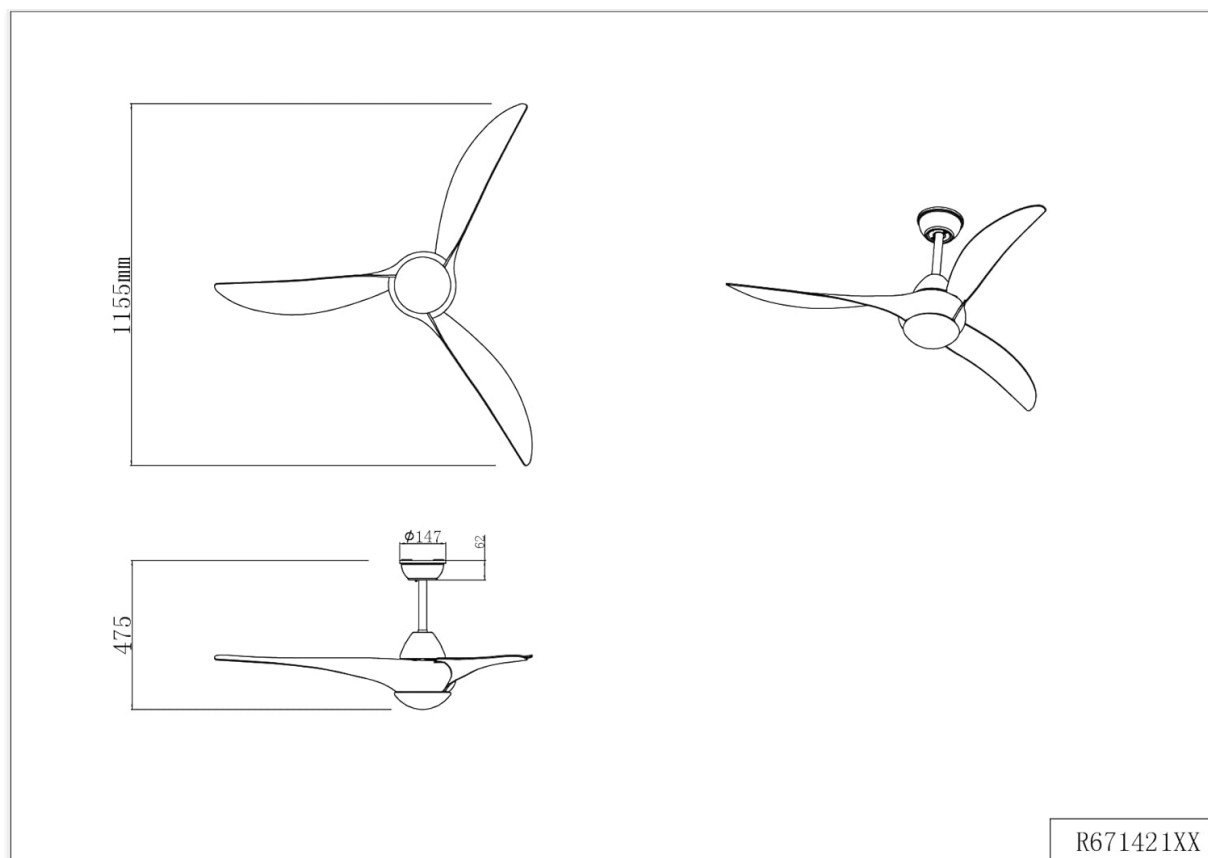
Technical drawing showing dimensions (115.5 cm diameter, 47.5 cm height).
